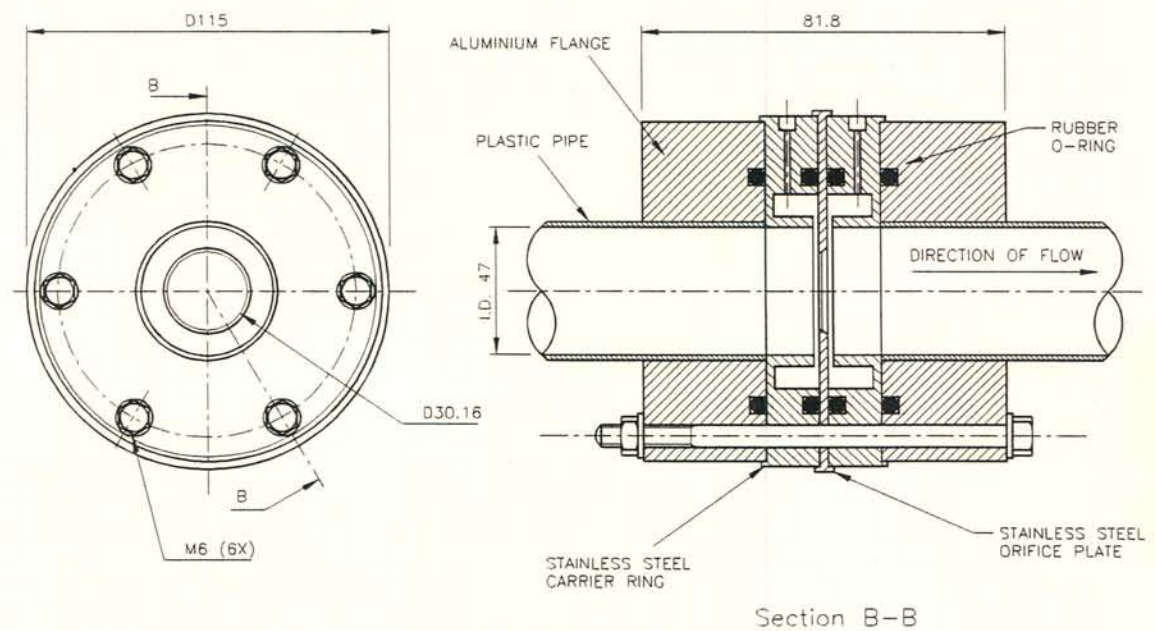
(d): Assembly drawing of orifice 1 installation.
